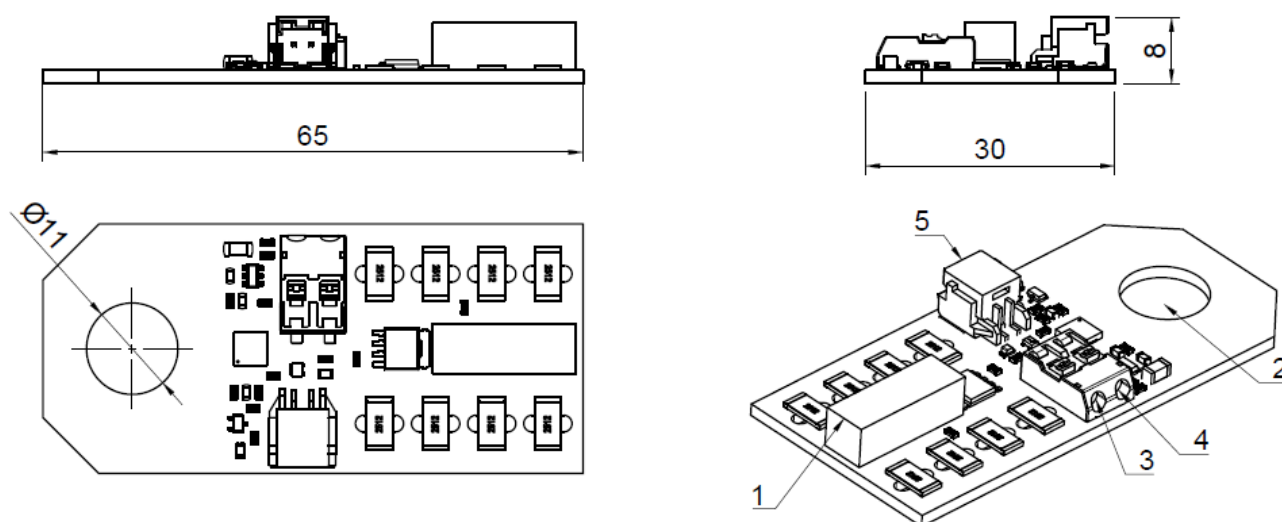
EMUS G1 Cell Module 1.5A (CM011A) mechanical drawing. All dimensions in millimeters.
